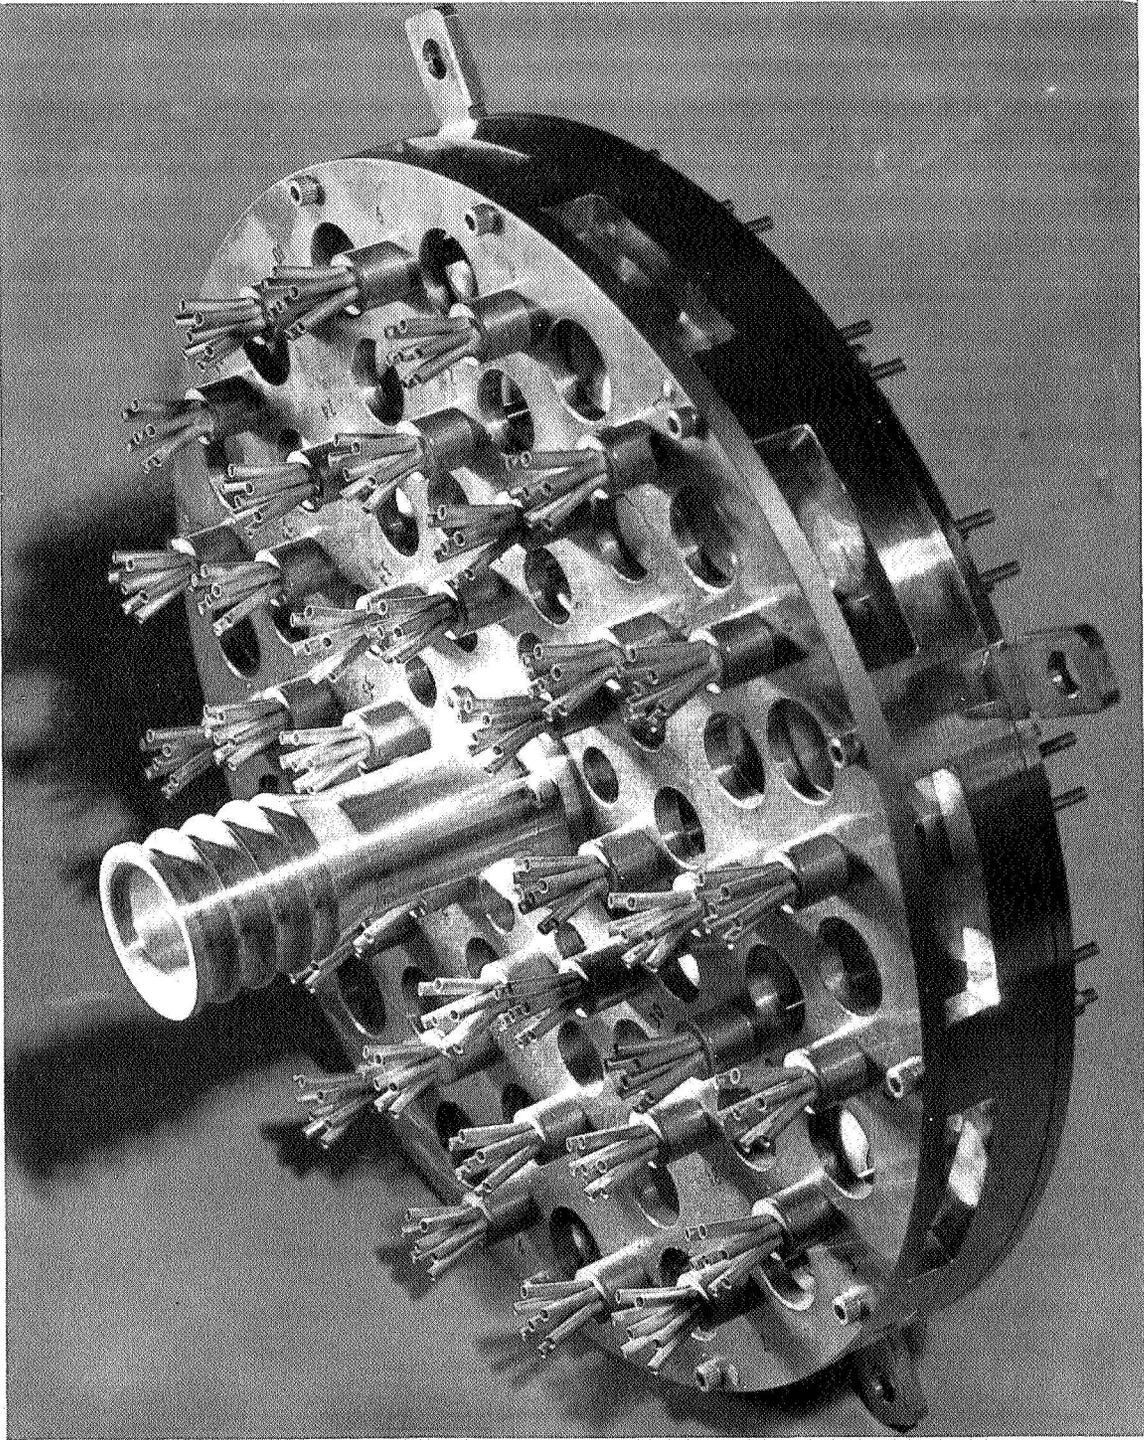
STAINLESS STEEL ASSEMBLY OF 36 PNEUMATIC
